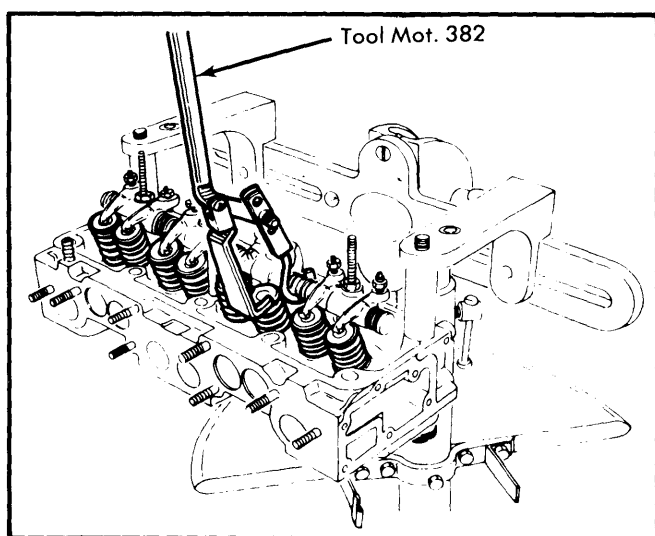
How to Position Valve Spring Removal Tool on Cylinder Head
